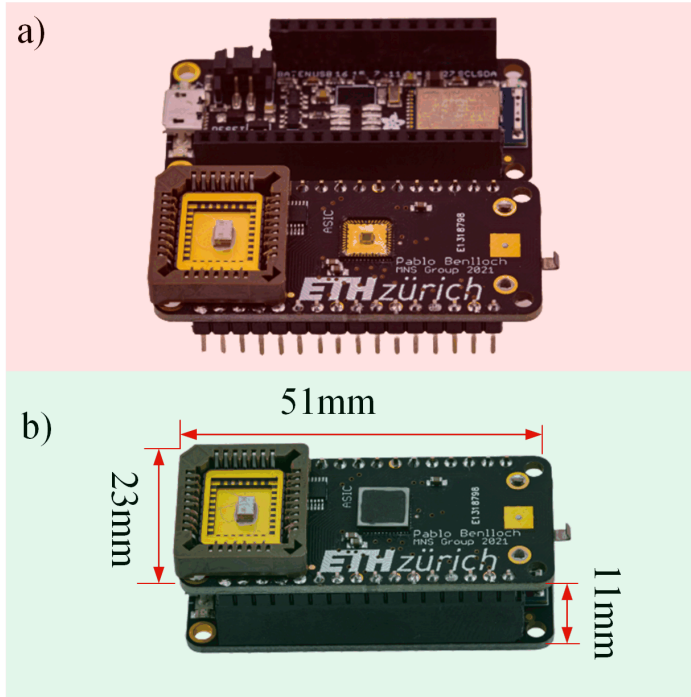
Physical design of: a) the daughterboard [12] PCB next to the Adafruit Feather devboard; b) physical dimensions of the final sensor node.
